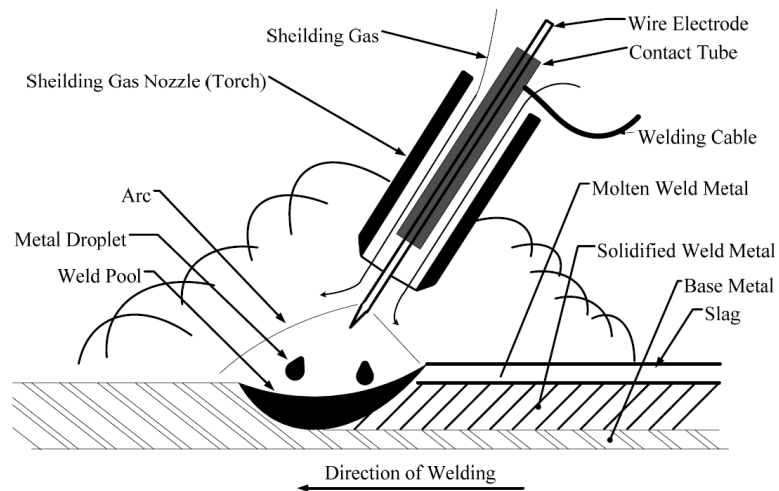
Gas Metal Arc Welding (GMAW) [Lee 2006]
